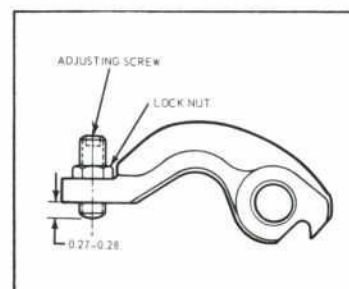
Rear Servo Lever Adjusting Screw Dimension
